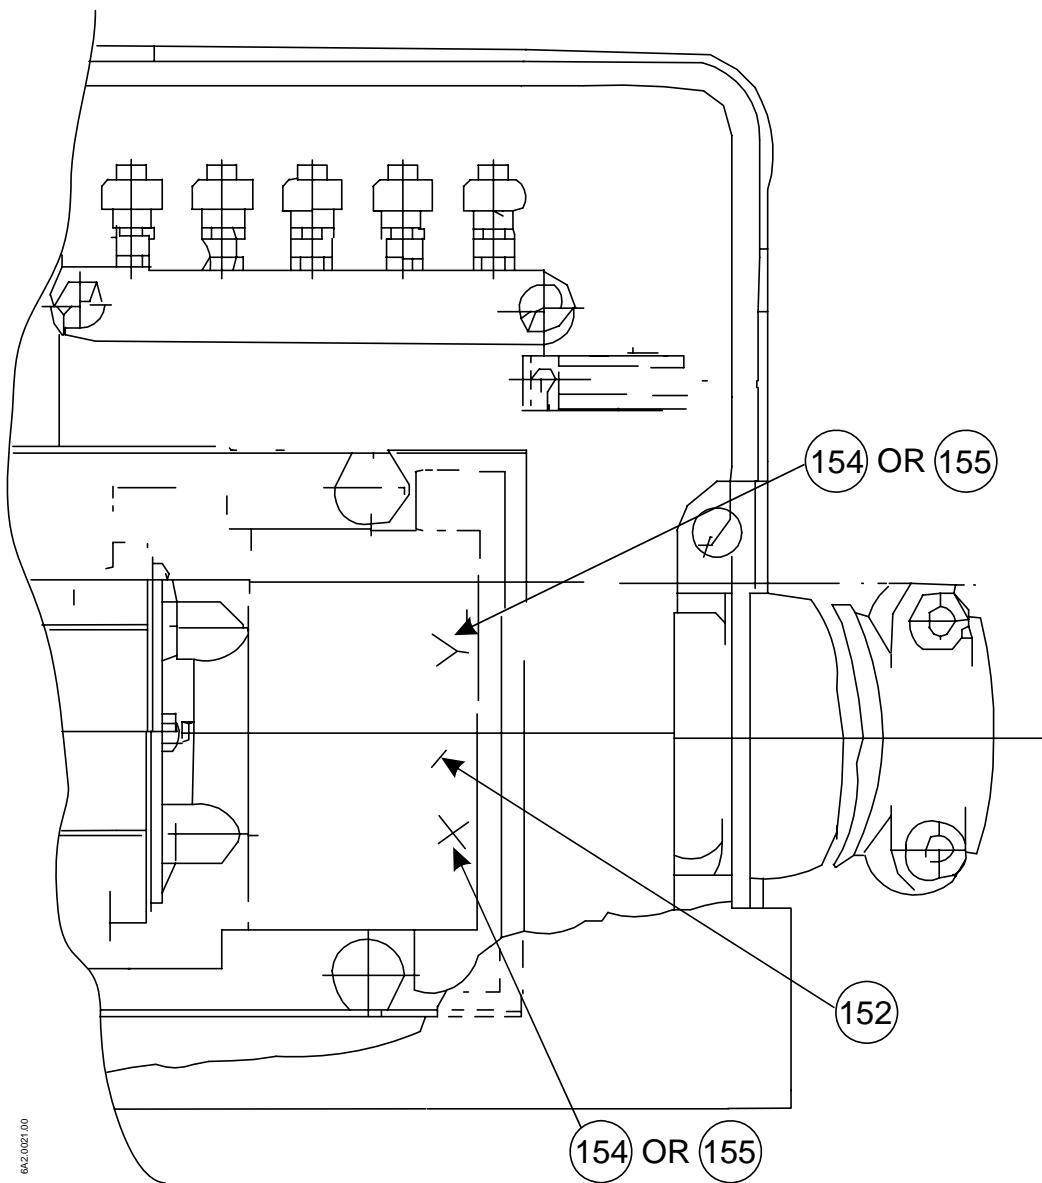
Contactor Assembly (N451161-5303) "X" and "Y" Label Location
